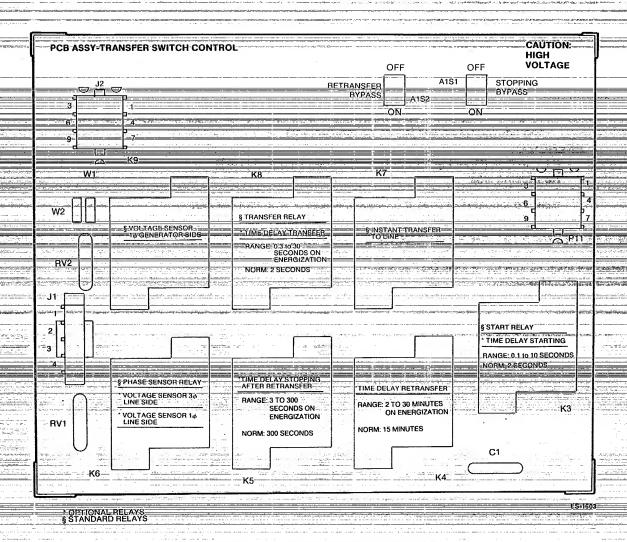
CONTROLLER PCB ASSEMBLY
